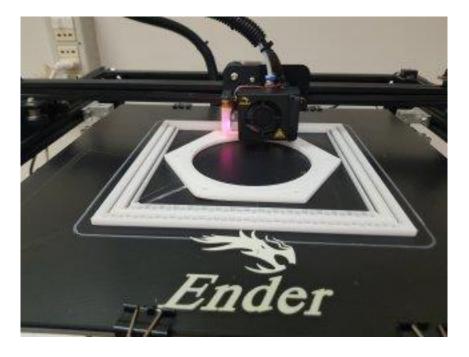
3D printing of ledge and support for the membrane of the pump.
